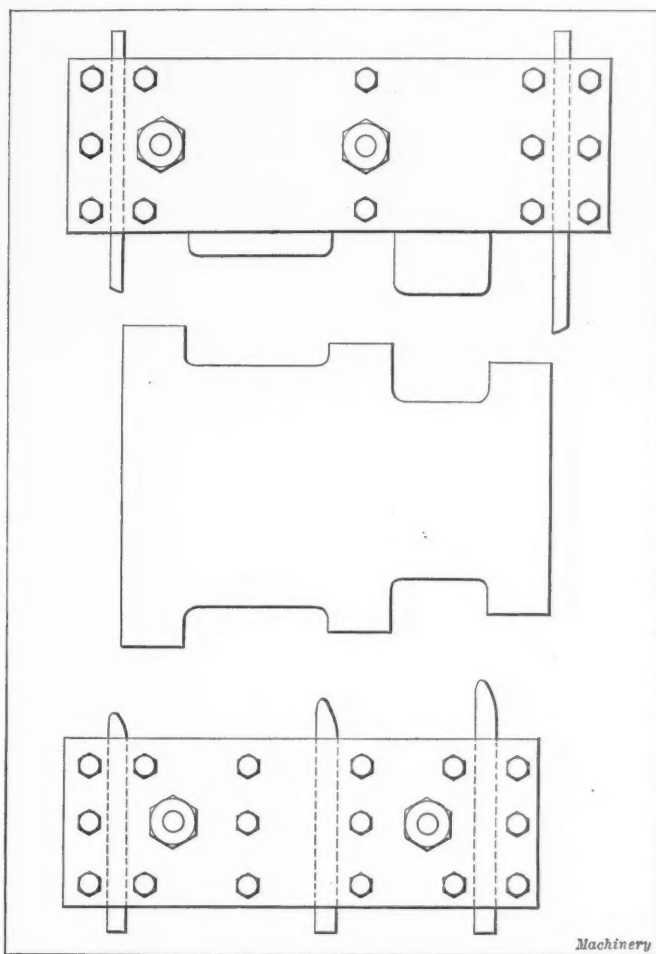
Diagram showing Tooling for turning and forming Blanks for Cluster Gears
